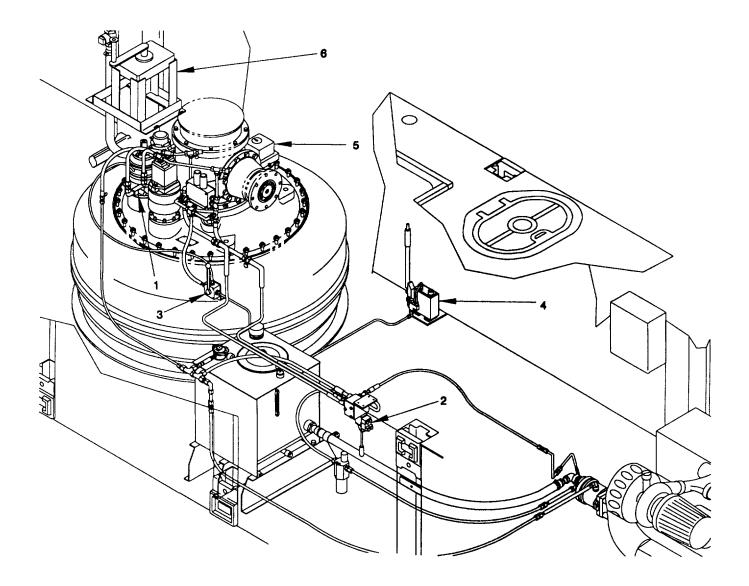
Emergency Shifting and Steering Controls and Indicators (Sheet 1 of 2).
